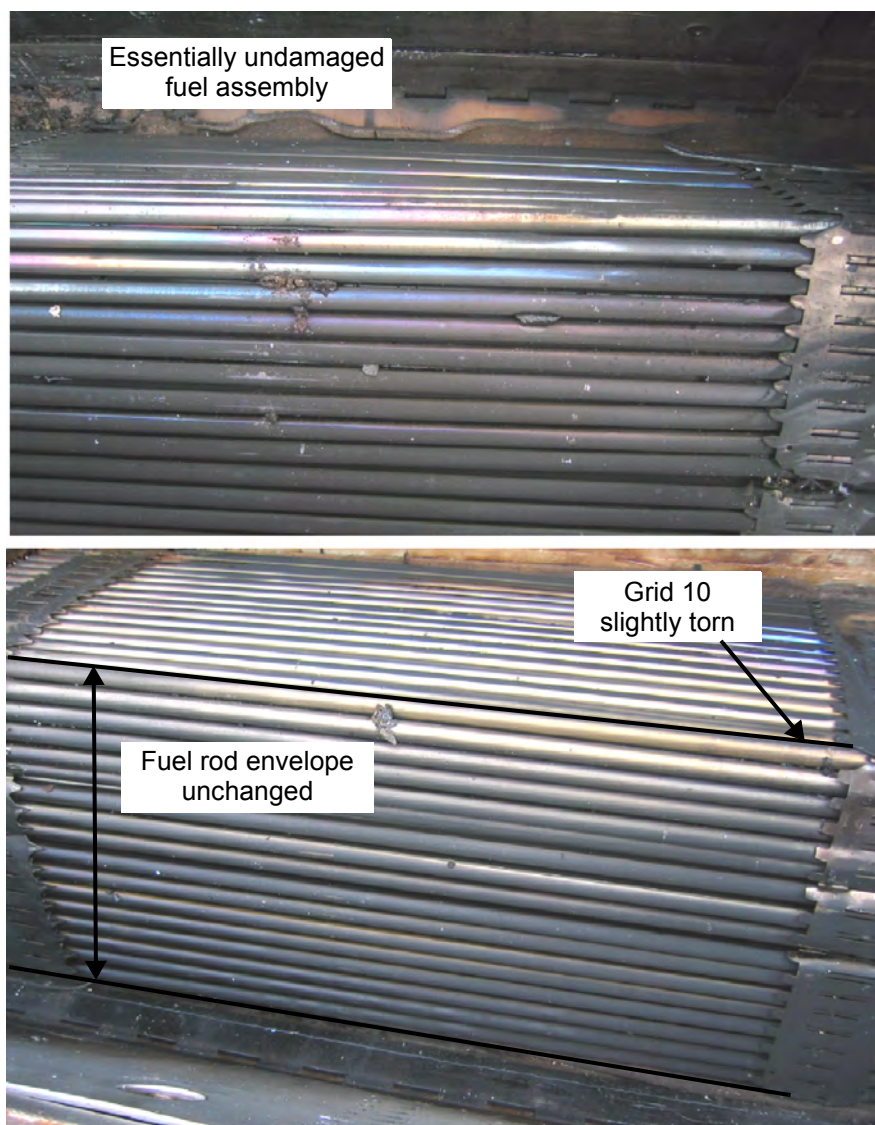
QTU-1 Fuel Assembly After Drop and Burn Tests
